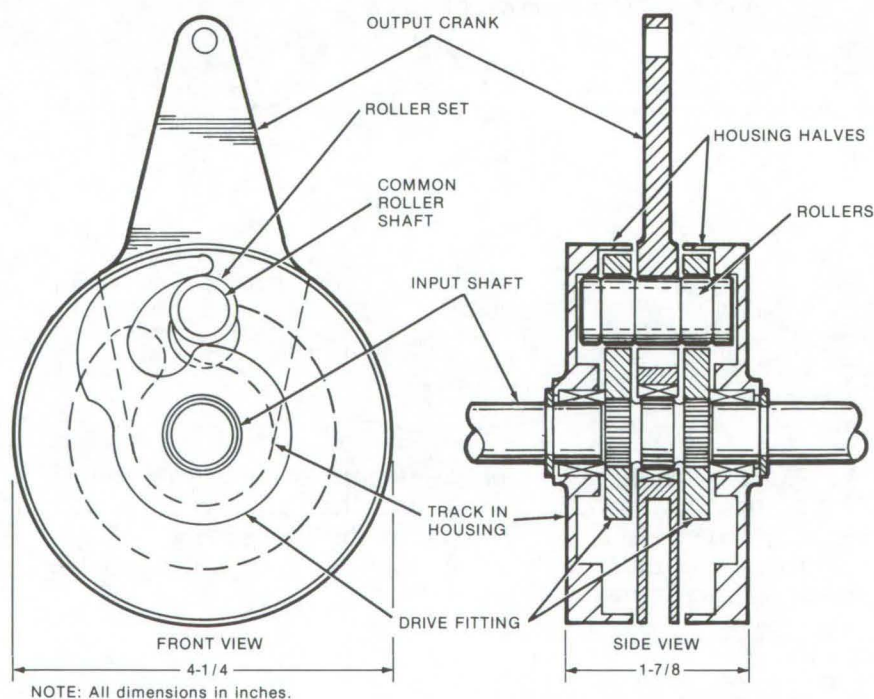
The Mechanical Sequencer has an input shaft splined to two drive fittings. In the left (front) view the drive fitting is shown touching a set of rollers that pass through the output crank. The roller set, consisting of five rollers on a common shaft, engages the two housing halves and the crank. The two outer rollers engage a track in the housing halves. The two adjacent rollers engage the drive fittings when the crank is in motion. The center roller engages the crank.
